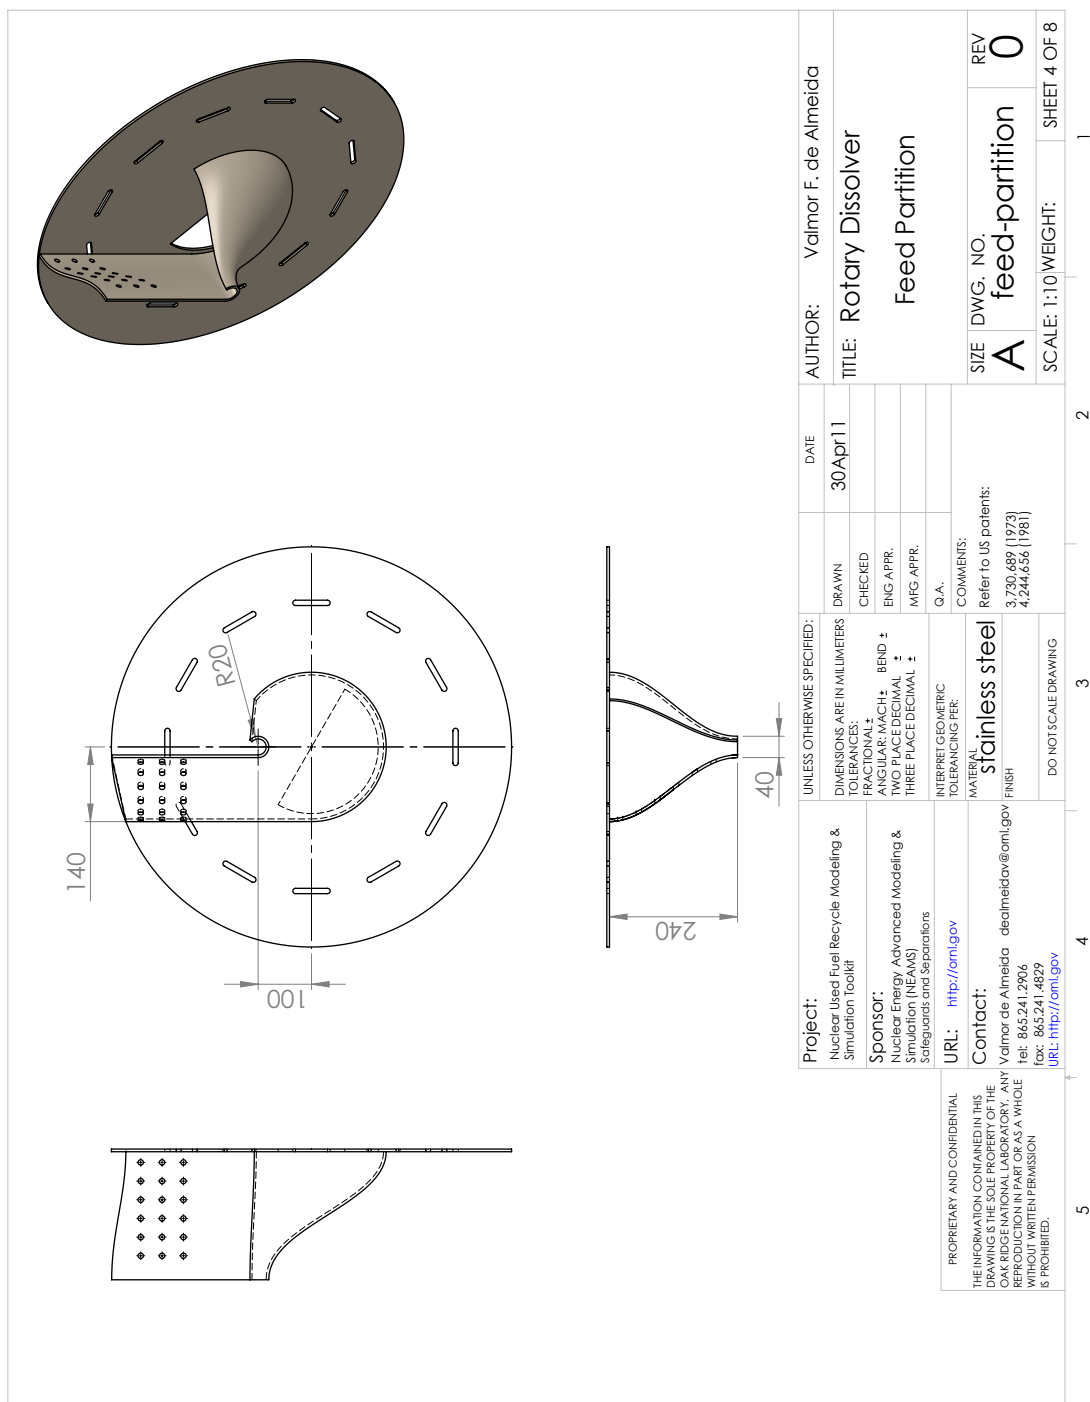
Rotary dissolver CAD feed partition drawing.
